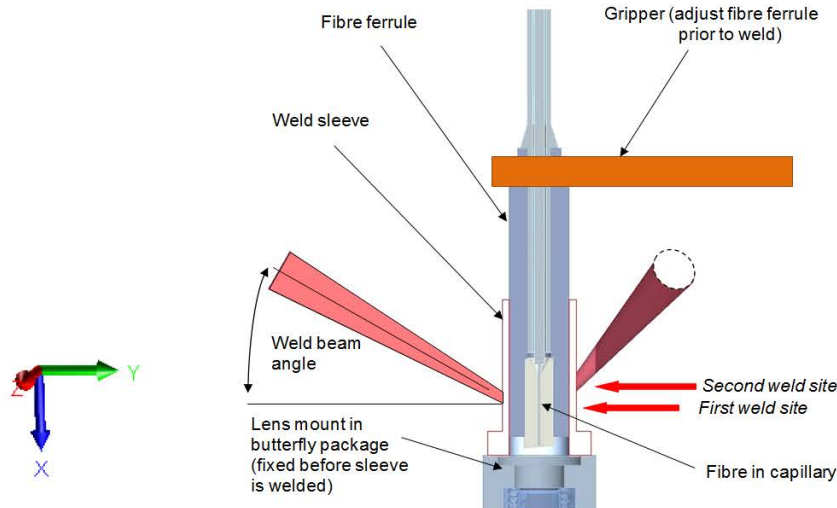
The setup of the Oclaro fibre capsule and the butterfly package prepared for laser micro welding.
